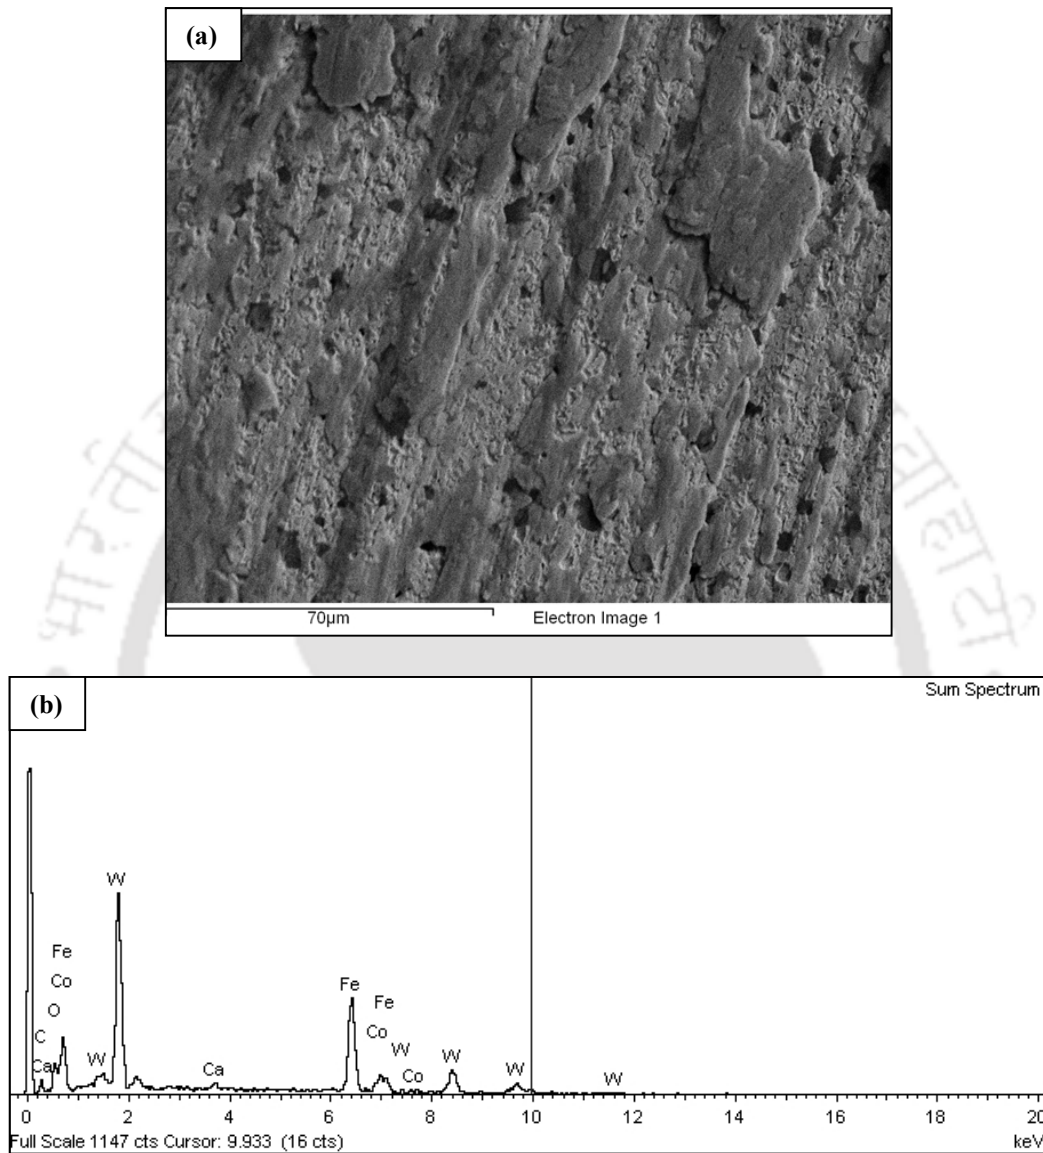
(a) Considered WC-Co-5 wt.% CaF₂ cutting tool surface for the elemental mapping
